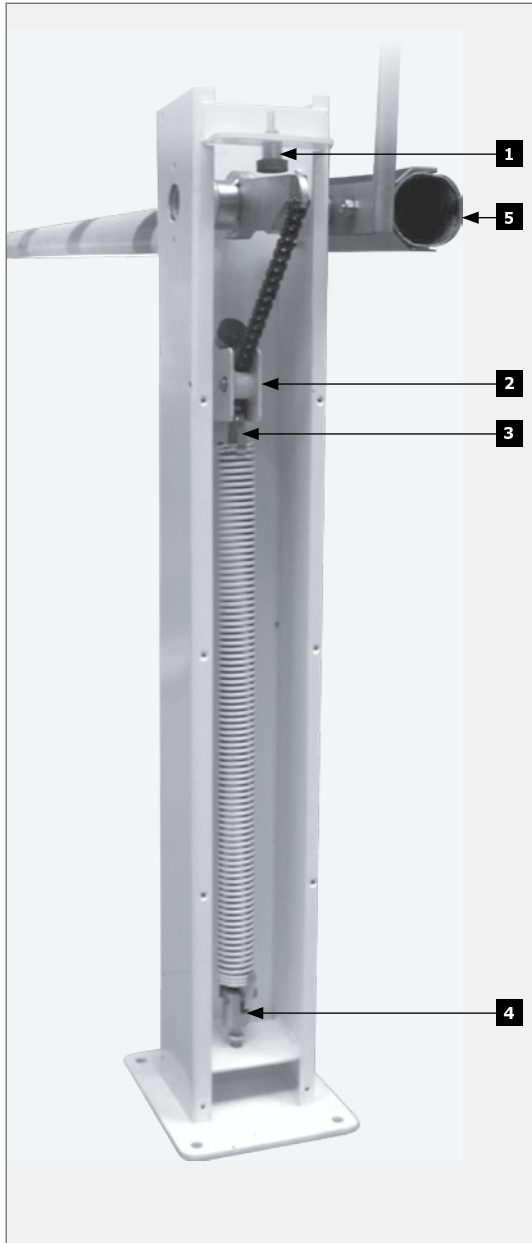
CENTINEL BARRIER INTERNAL SPRING ASSEMBLY
